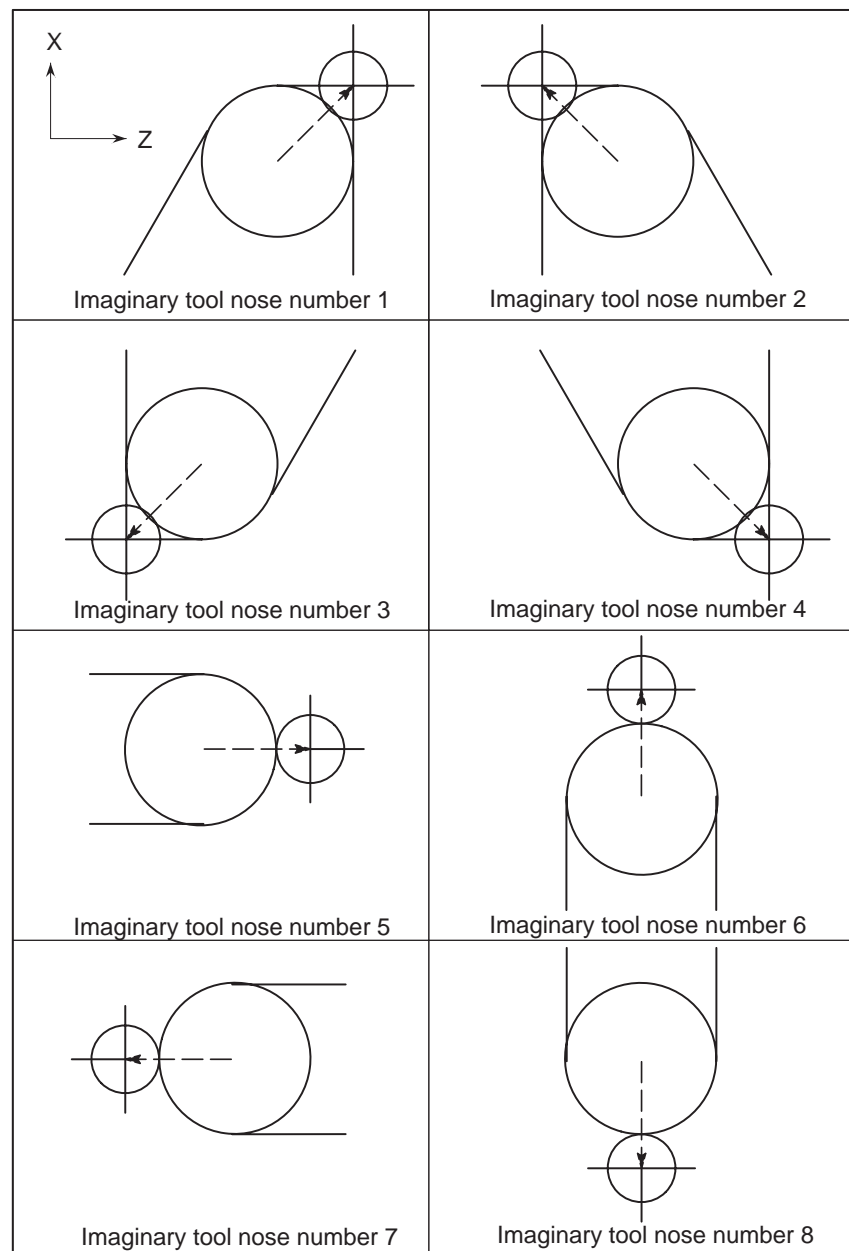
(d) Tool path when programming using the imaginary tool nose
